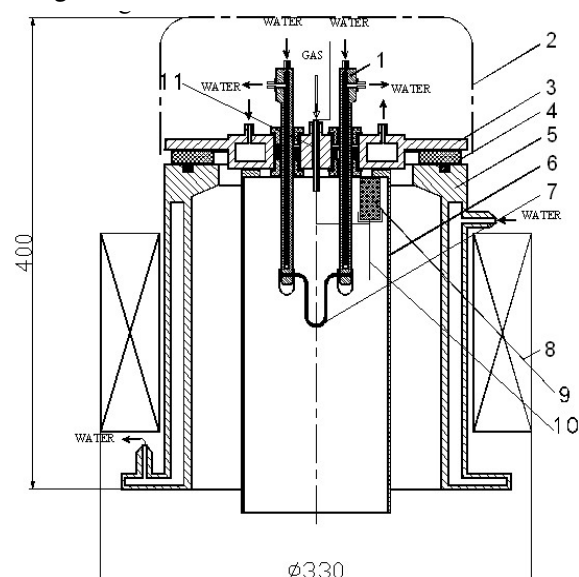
Simplified construction of "PINK" plasmagenerator equipped by the discharge initiation unit: 1 – cathode holder; 2 – protective cover; 3 – cathode flange; 4 – rubber seal; 5 – body; 6 – hollow cathode; 7 – tungsten heated cathode; 8 – magnetic coil; 9 – ceramic insulator; 10 – tungsten igniter electrode; 11 – ceramic insulating pipe
